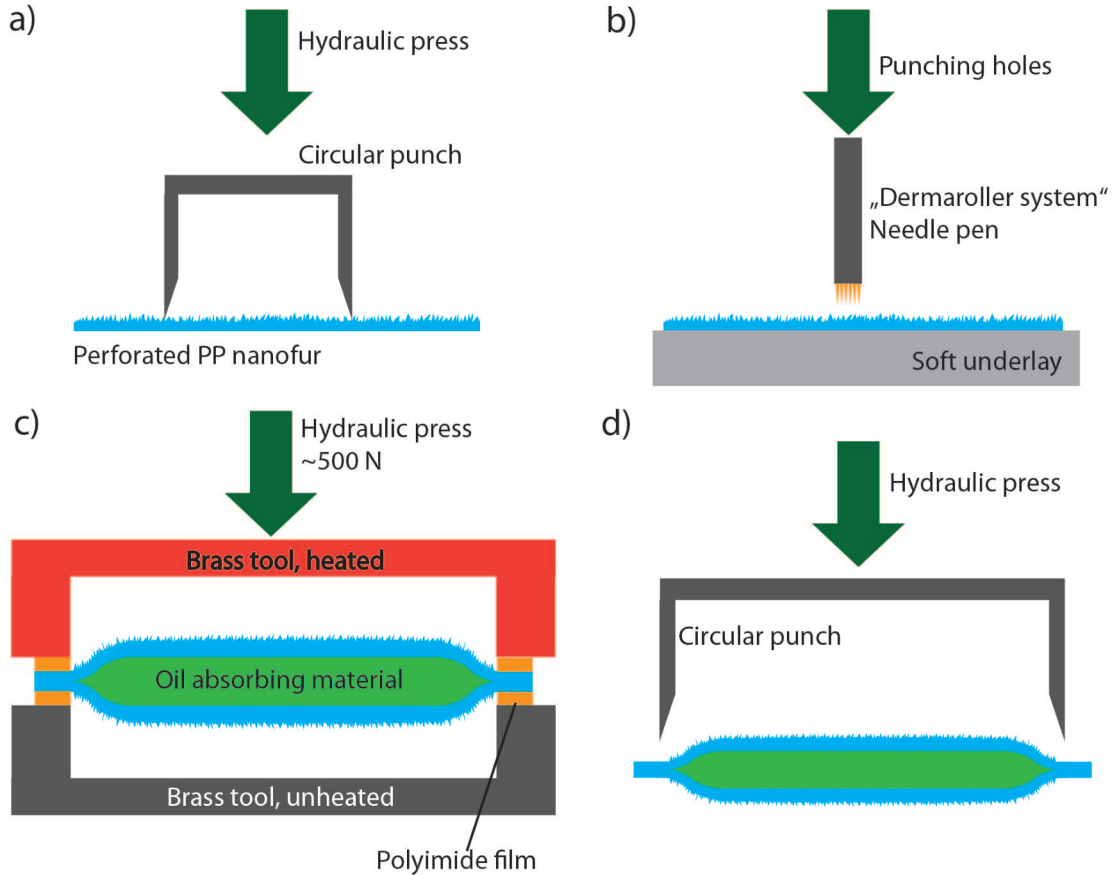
Schematic of the nanopad fabrication steps. a) Circular cut-outs are produced using a circular punch. b) The pieces are perforated by punching holes with a needle pen. A soft underlay guarantees the needles penetrating the film completely. c) Two cut-outs are filled with oil absorbing material, placed in between polyimide masks, and heat welded. d) The uneven edge is cut off with a circular punch. The content of this figure was previously published in [111].
